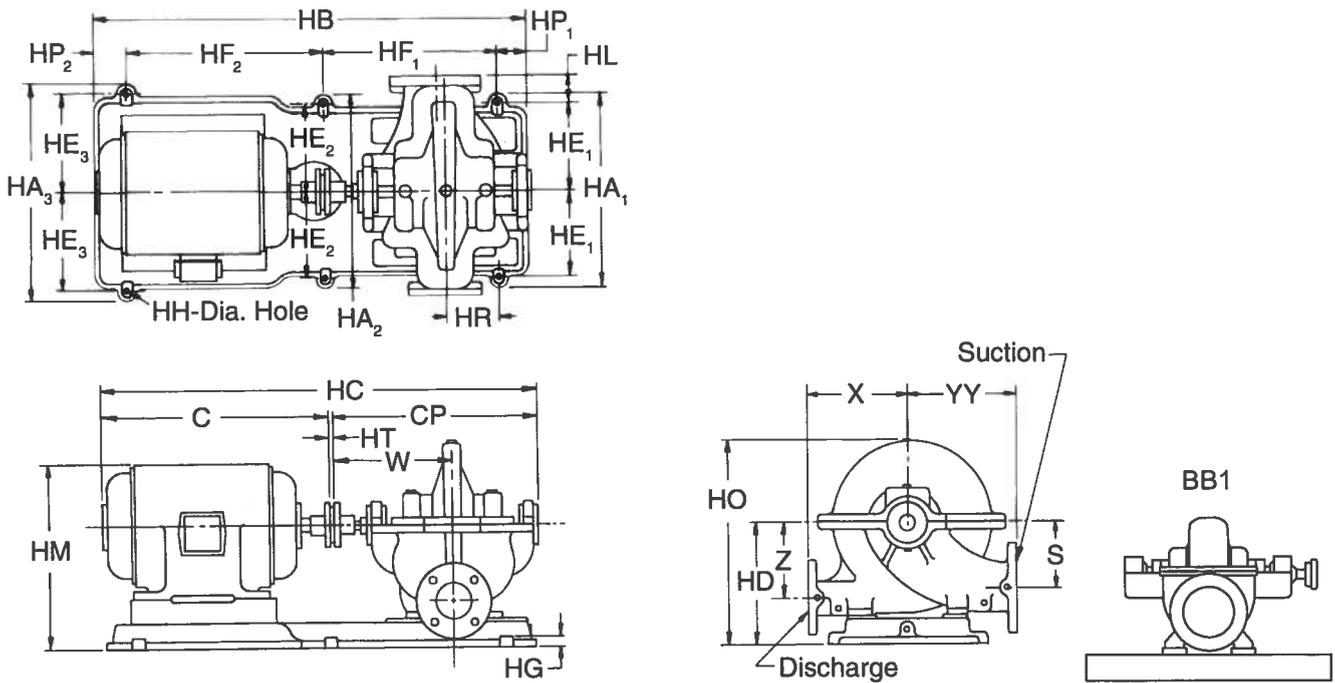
Impeller between bearings – flexibly coupled – single stage – axial (horizontal) split case – pump on baseplate
